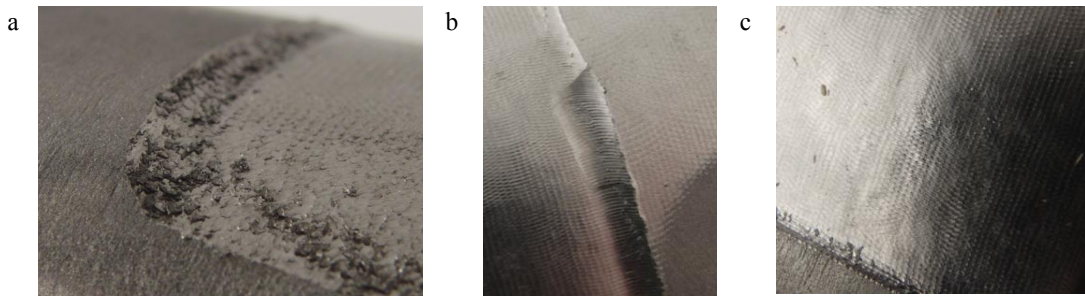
(a) Surface defects, (b) Imperfect surface structure, (c) Surface structure.
